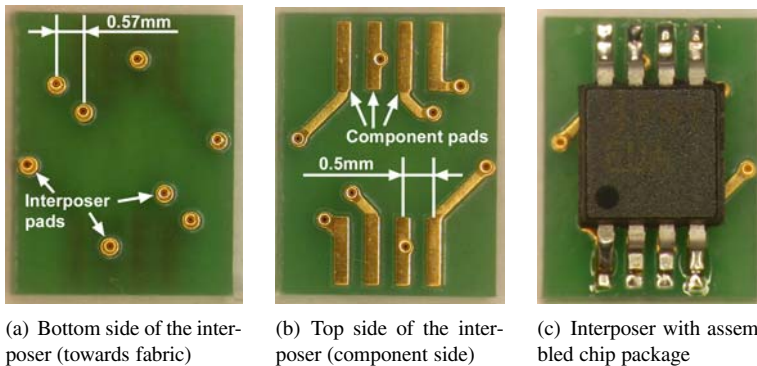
Example for an interposer build-up (component pads on top side, interposer pads on bottom side)
